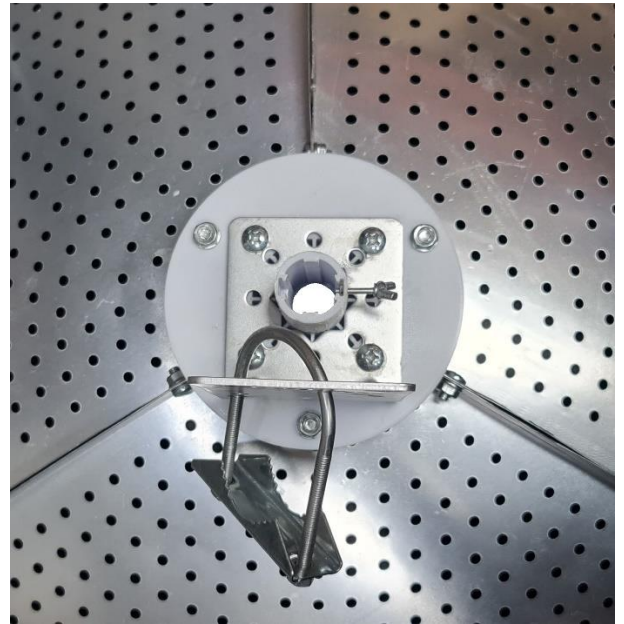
Rear Pipe Guide Mounting / Montage der hinteren Rohrführung / Montage du guide de tuyau arrière / Montař tylnego uchwyty przewodnika rury / Montaggio della guida tubi posteriore / Montaje del guía de tubo trasero / Achterbuisgeleiderbevestiging / Montering av bakre rörguide / Монтаж на задния тръбен водач / Hátsó csővezető rögzítése / Montagem da guia traseira do tubo / Montare suport ghidaj țeavă spate / 後部パイプガイドの取り付け / 后部管道导向安装
